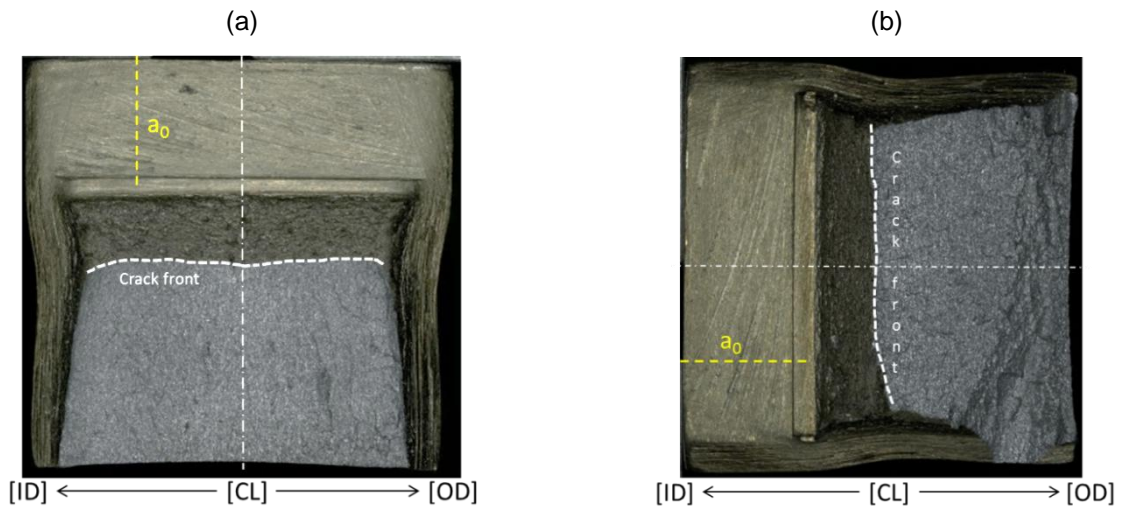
Fracture surface for TT notch (a), fracture surface for ID notch (b).
